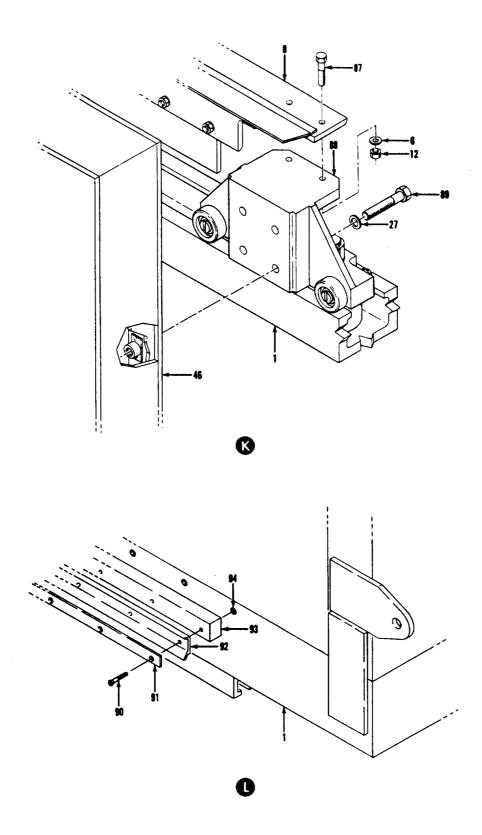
Extension Platform Assembly (Sheet 8 of 13)
